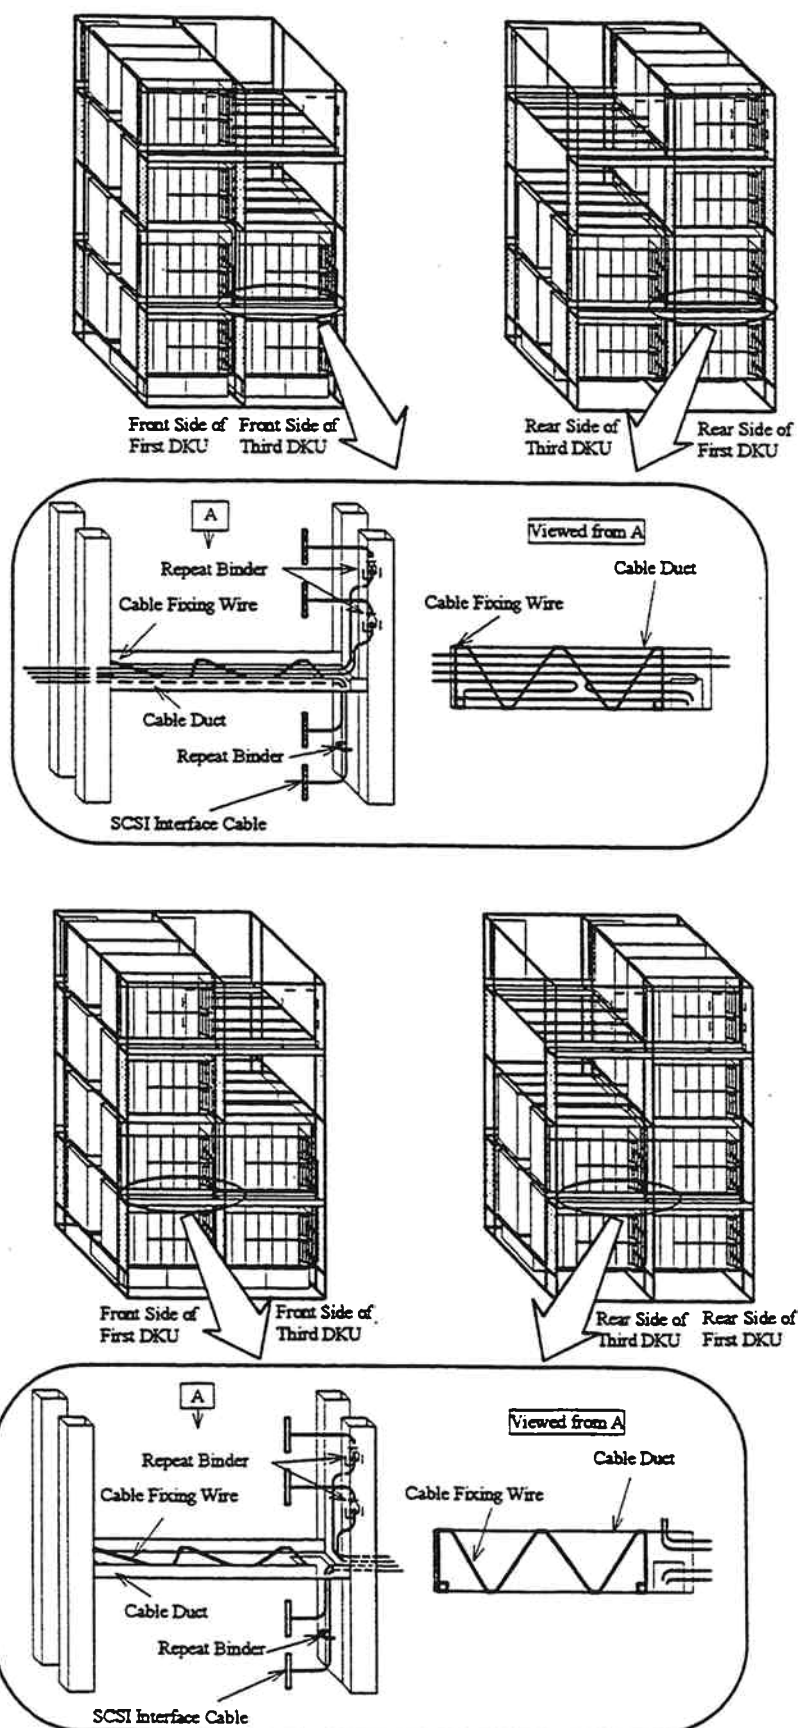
Removal of the SCSI Interface Cables
